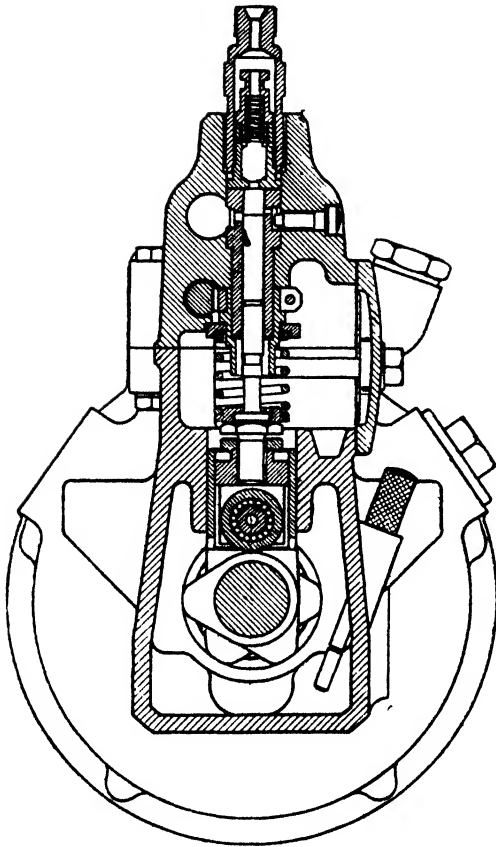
SECTION OF SIMMS FUEL-INJECTION PUMP
